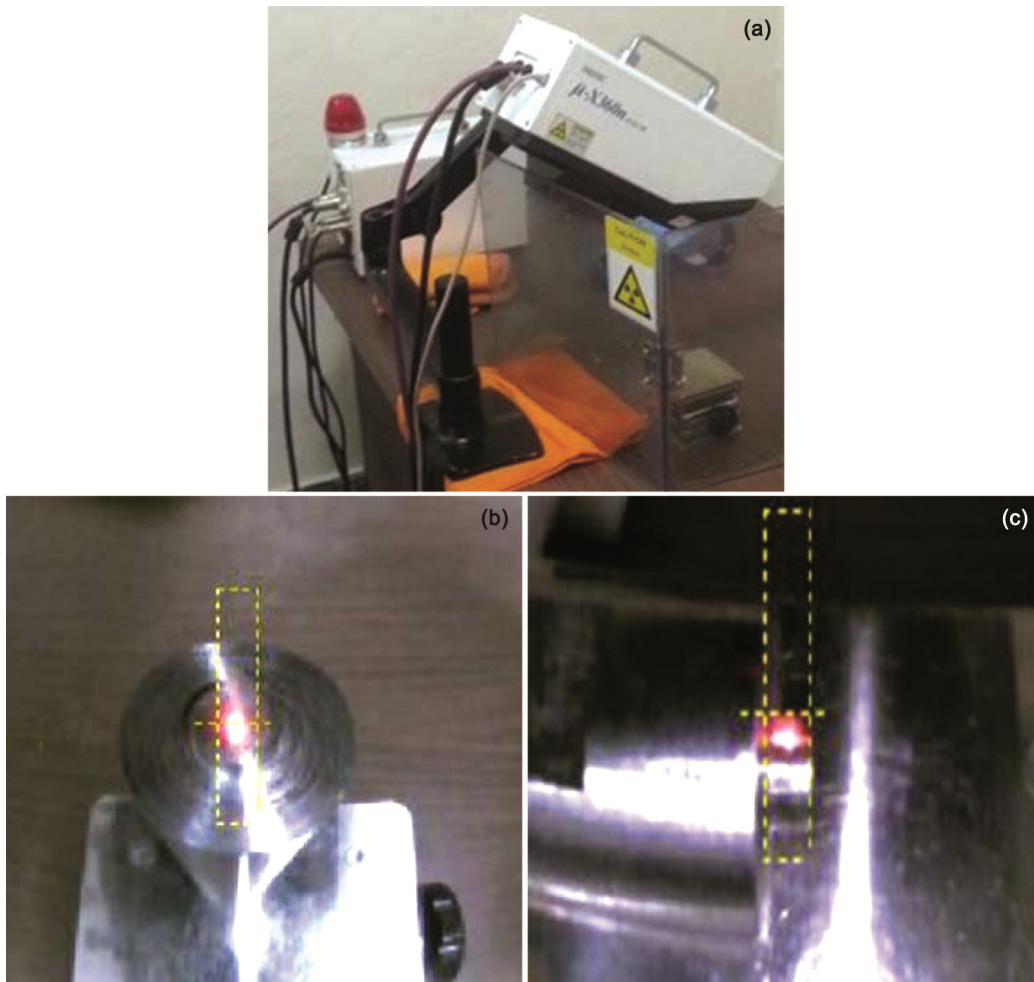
(a) Portable stress analyzer setup, (b) Image captured in circular probe and (c) Taper circular probe.
